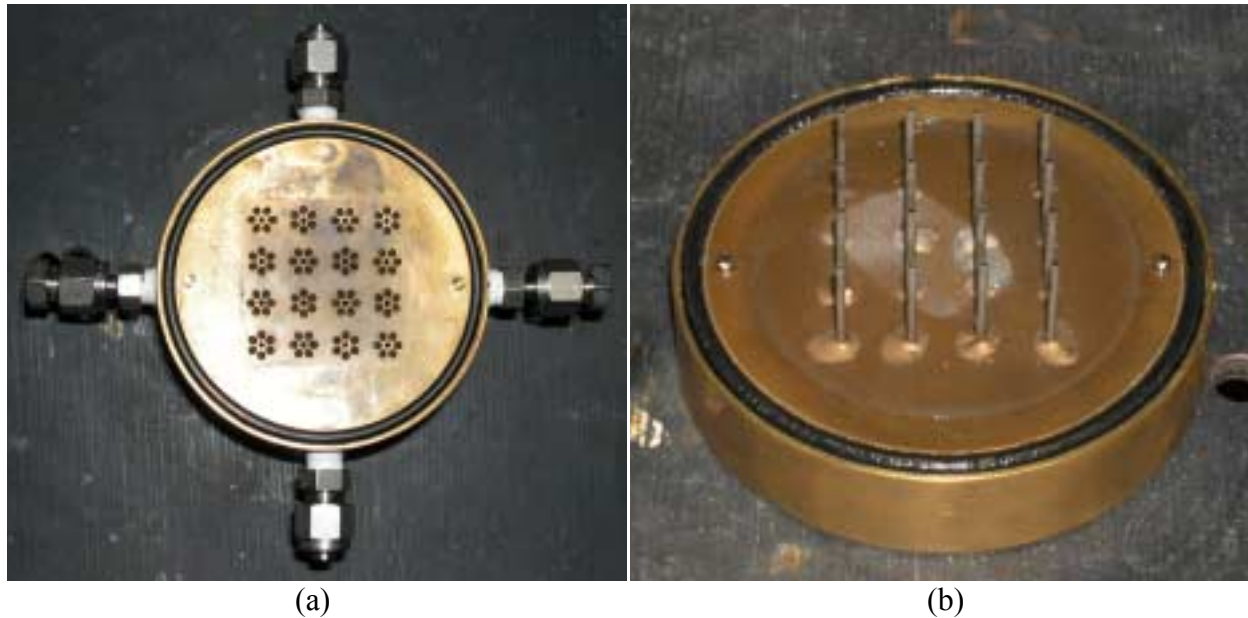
Injector features 16 fuel-centered impinging jet elements. For each element, fuel is introduced through the central hole, whereas the oxidizer is introduced through six angled hole that impinge and mix rapidly with the central fuel jet. (a) Impinging jet injector face, (b) Central fuel tubes for injector.
